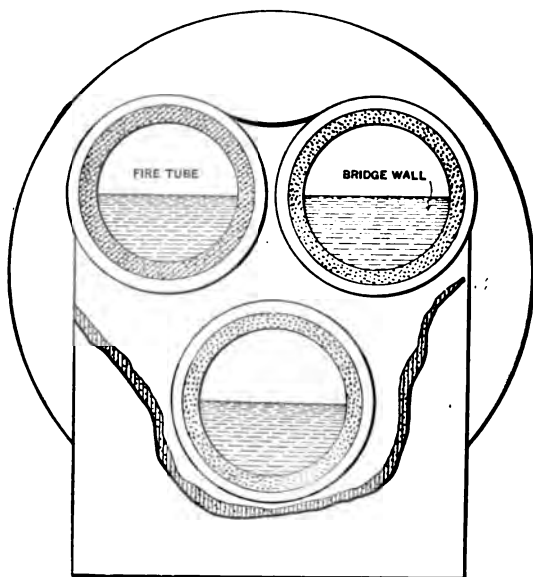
BACK END OF BOILER, SHOWING THREE FIRE-TUBES.
